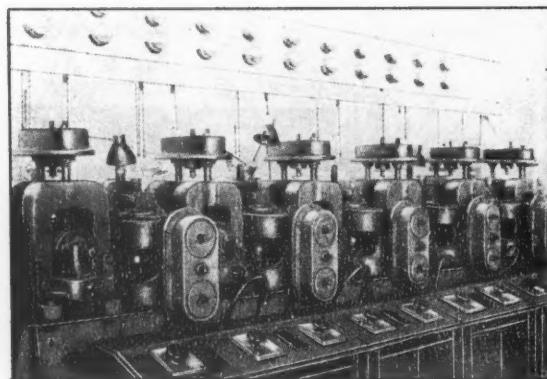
12-stand mill for the continuous rolling of thin wire.
